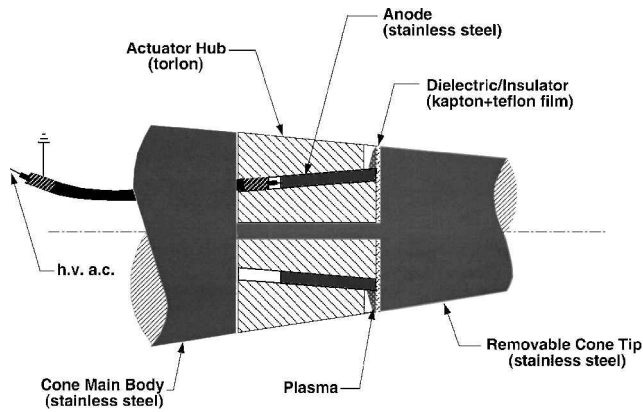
Schematic cutaway drawing of glow-discharge actuator hub.
